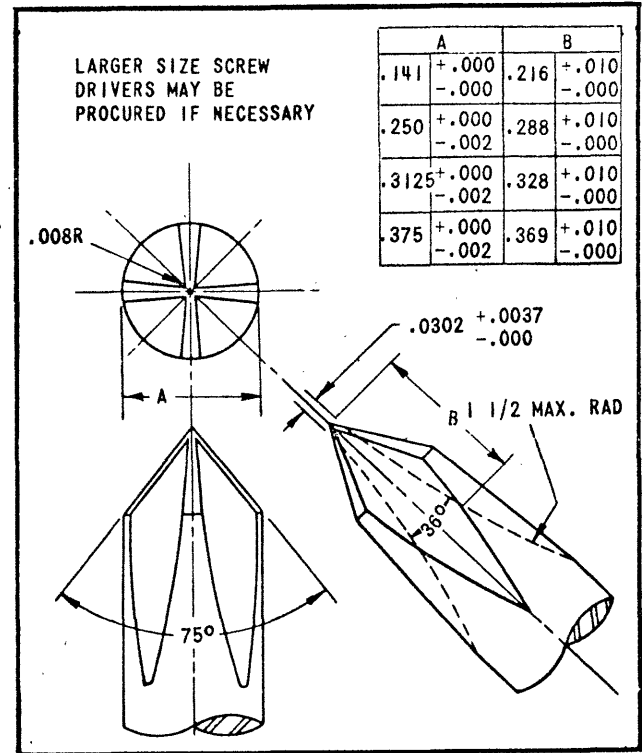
Reed and Prince Screw Driver Head Dimensions
